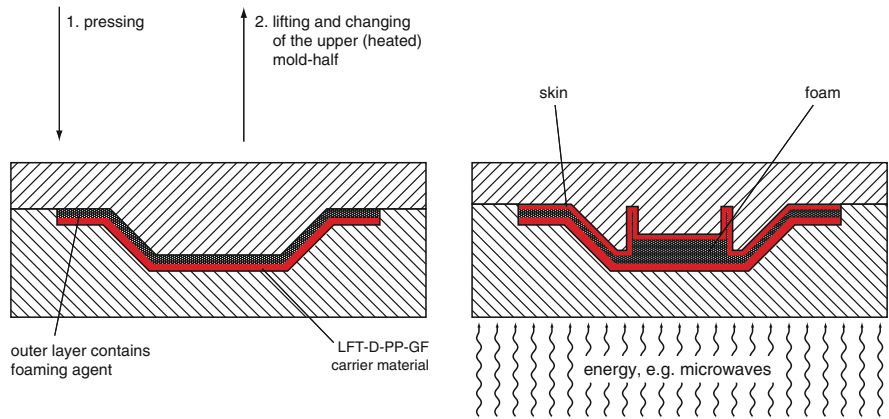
Inmold-assembled monoplasic dashboard – steps involved in production
